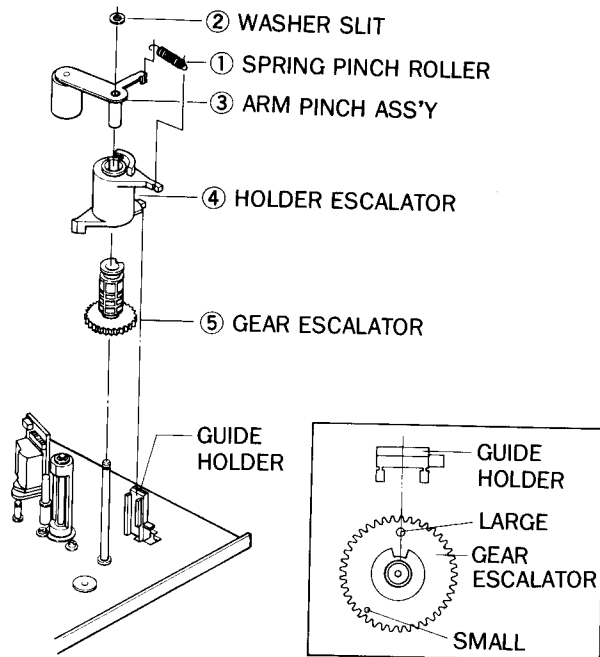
Pinch Roller Unit & Gear Escalator Removal
